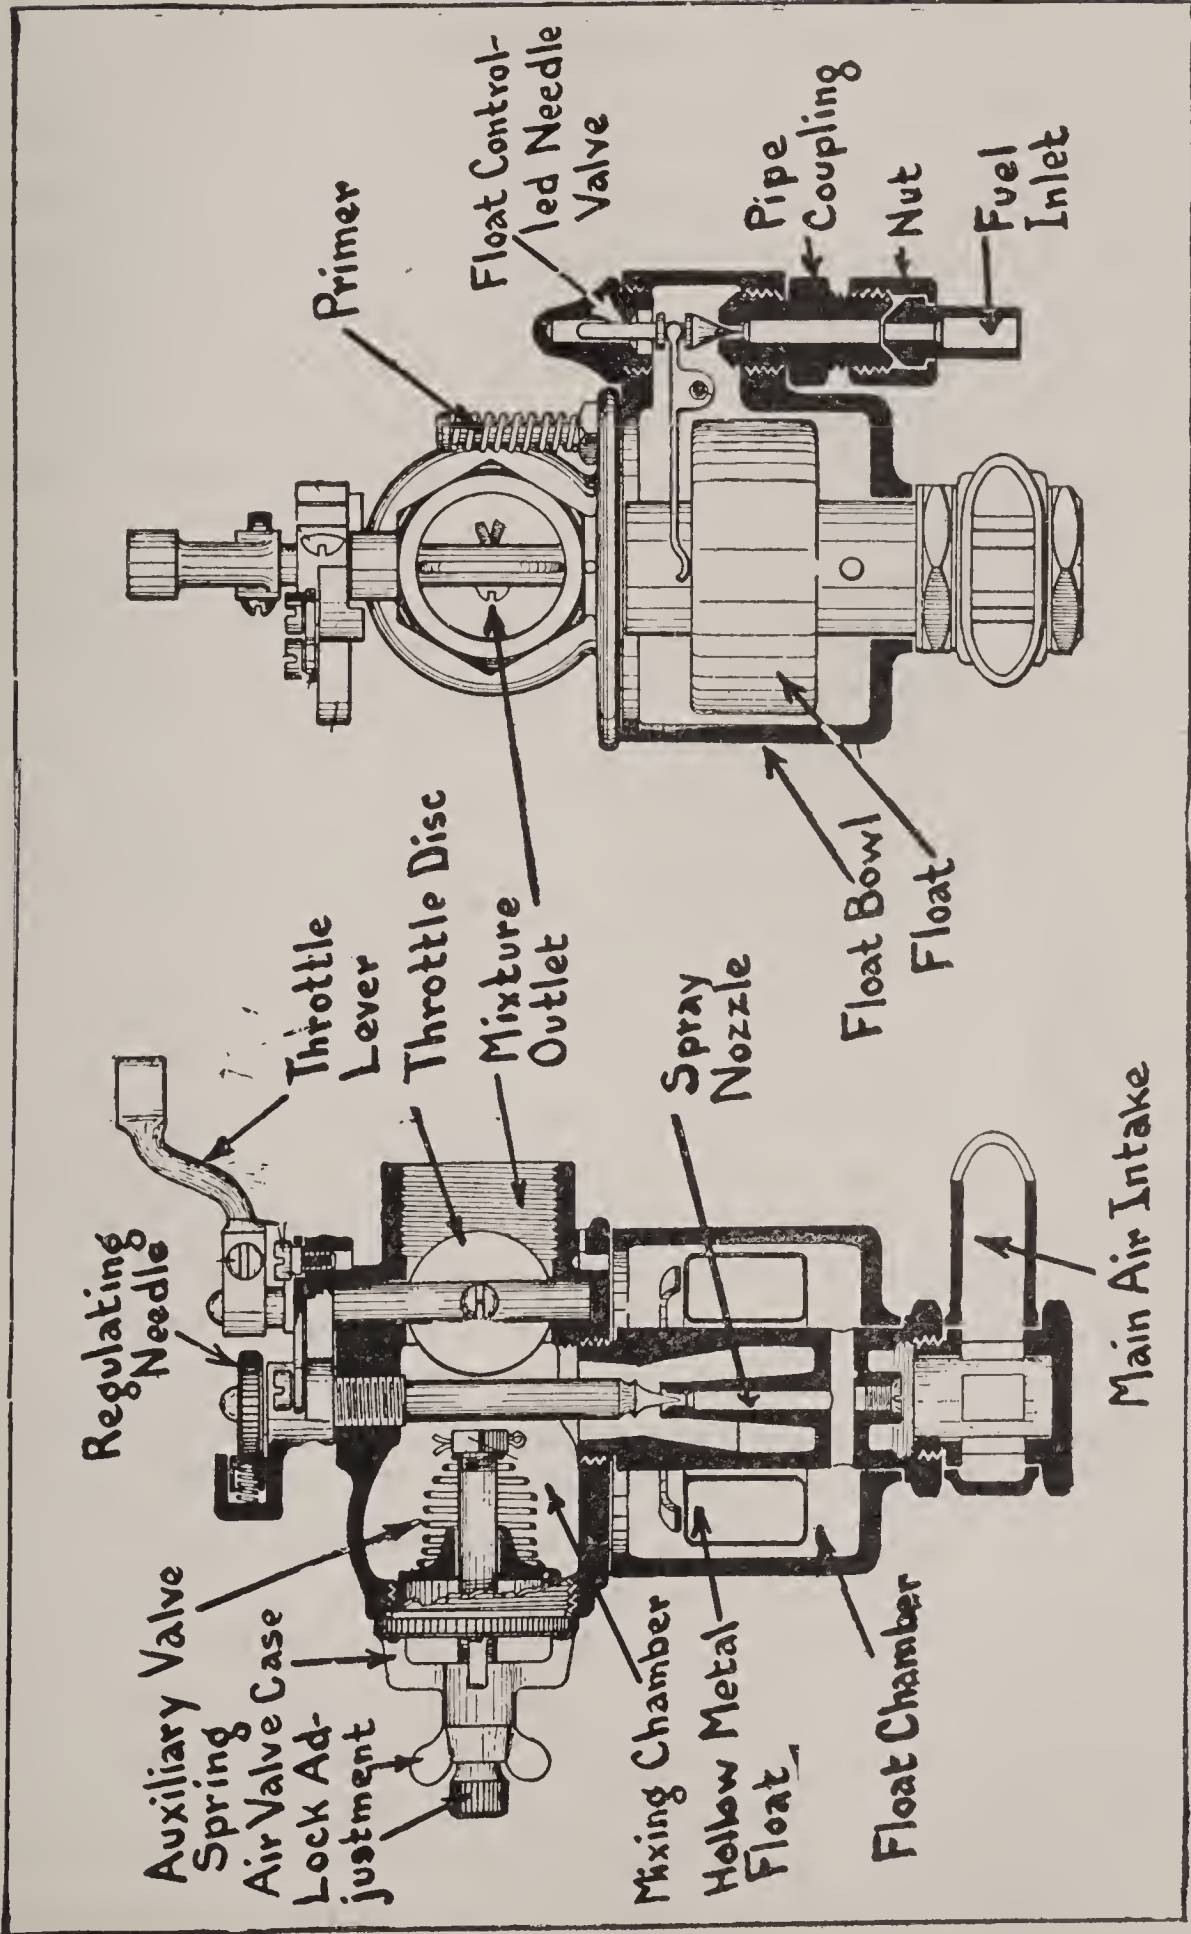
Sectional Views Showing Construction of Breeze Motorcycle Carburetor.
